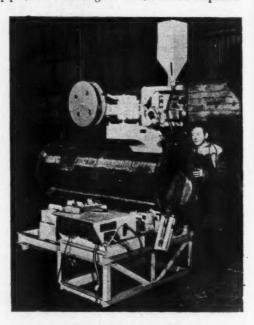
Typical application of a snapswitch to in-process gauging equipment on a cylindrical grinding machine
